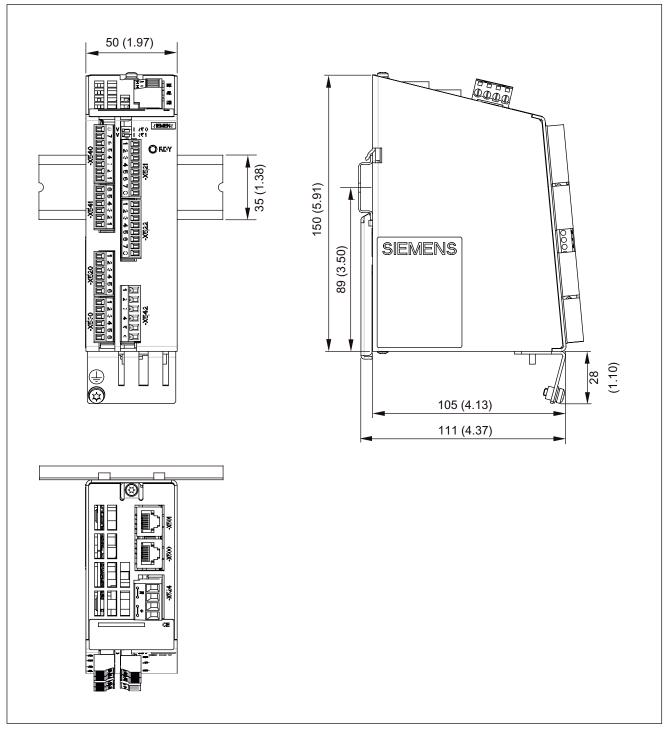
Dimension drawing TM31, order number: 6SL3055-0AA00-3AA1
